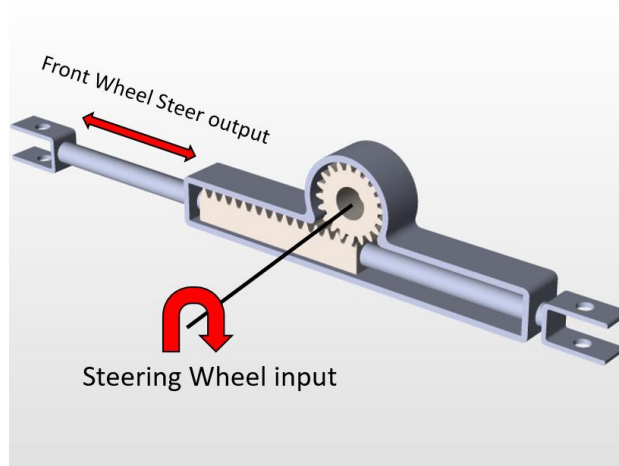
Pinion-Rack gearing. Source: e-Tech Racing
